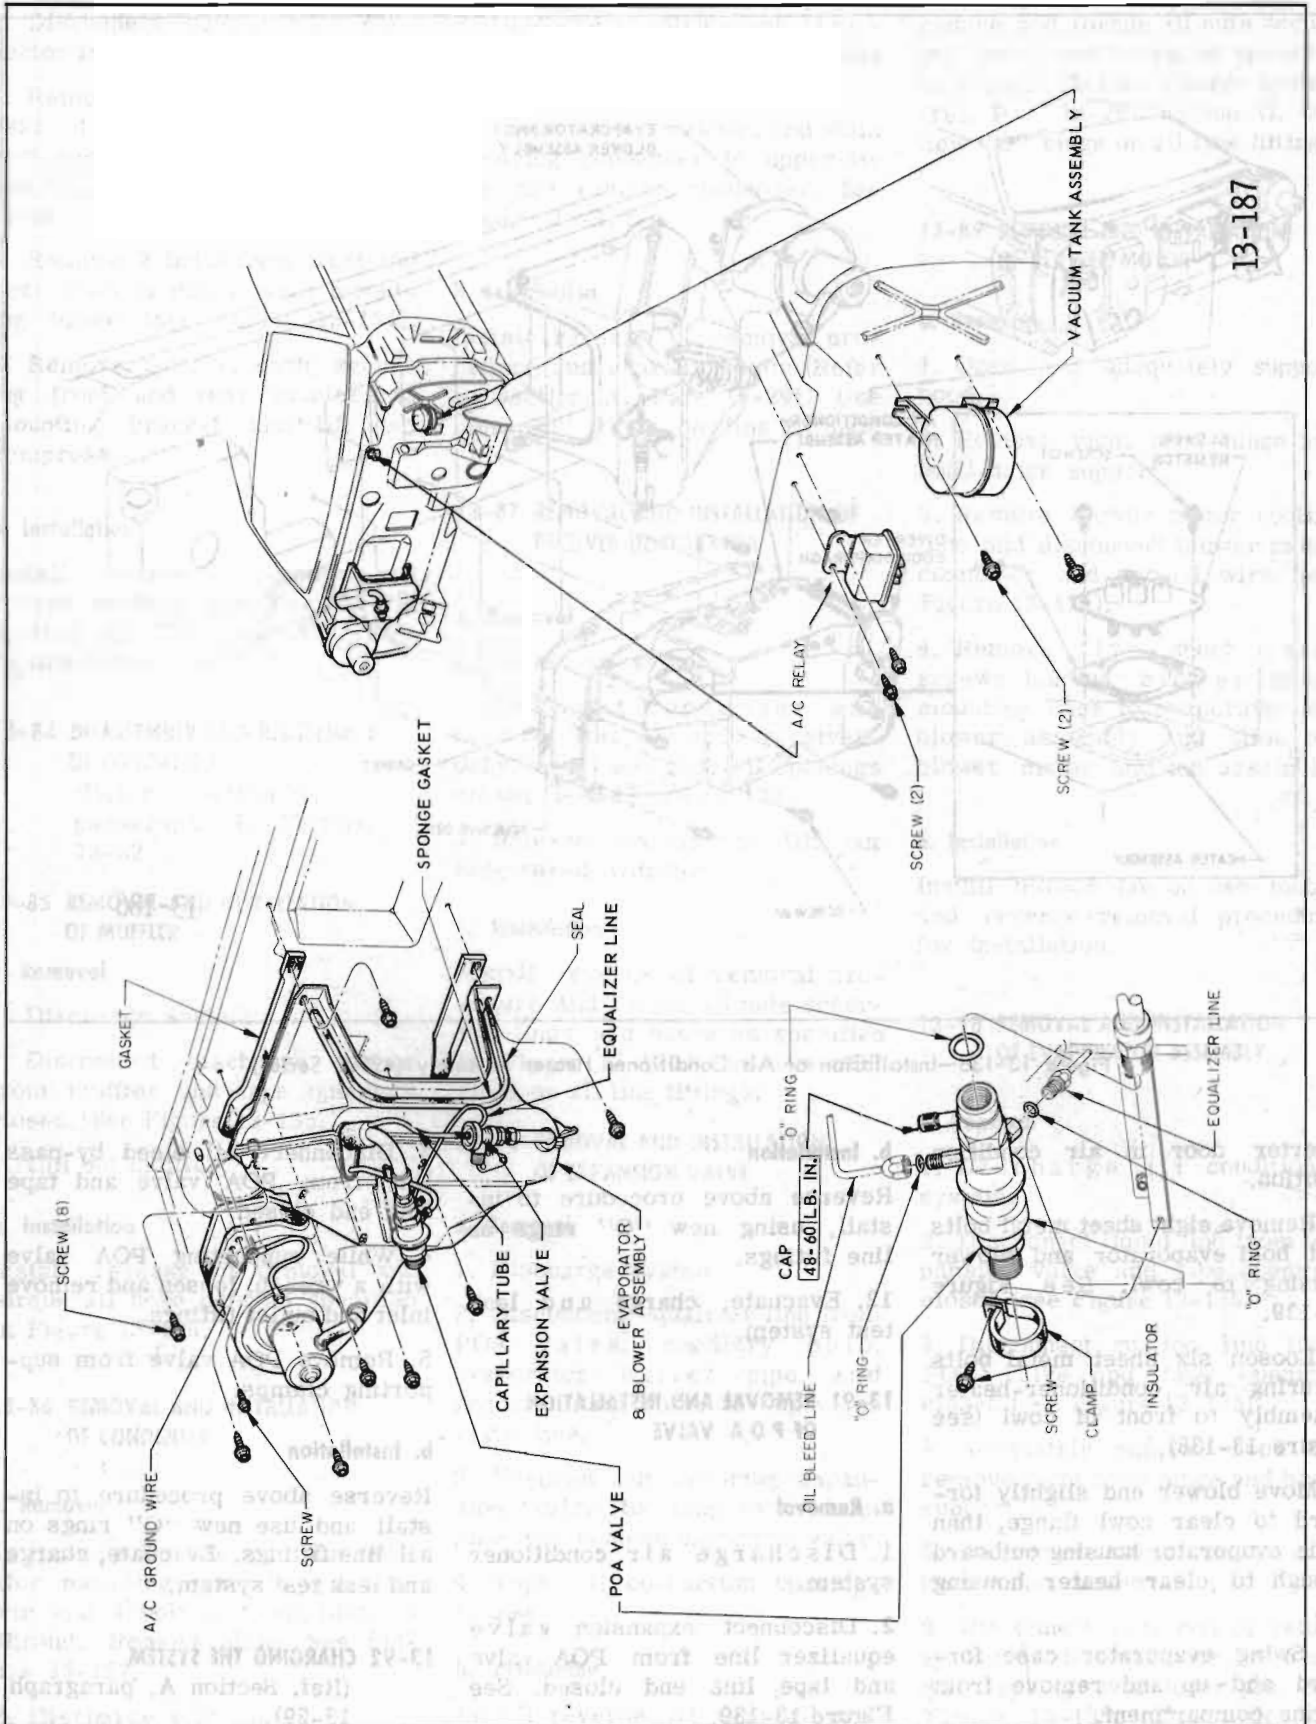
Installation of Evaporator Assembly & POA Valve (49000 Series)
